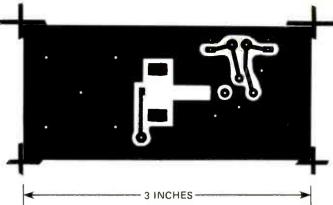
TOP OF MIXER BOARD shows where holes are to be drilled. Jack
